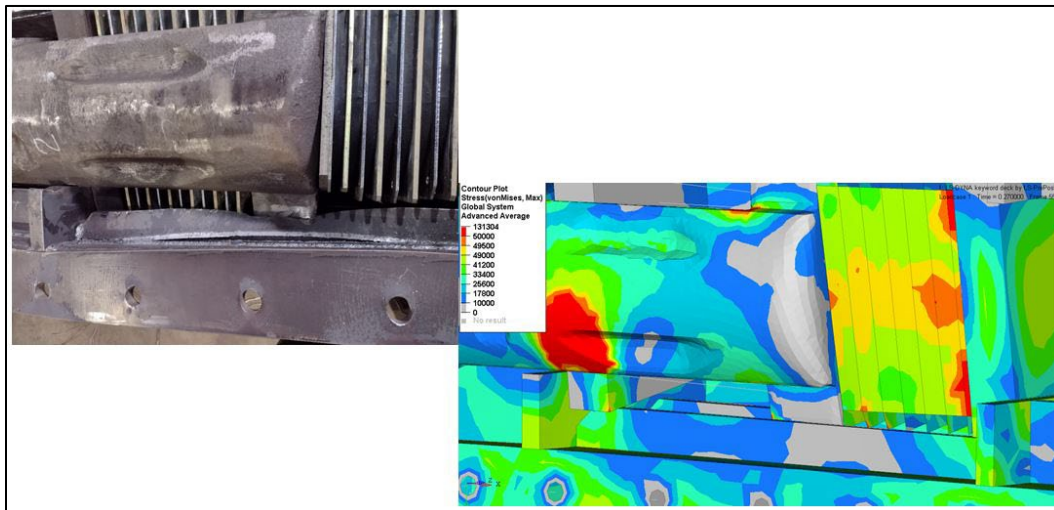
Yoke and Draft Gear Inside Sill Contact Comparison
